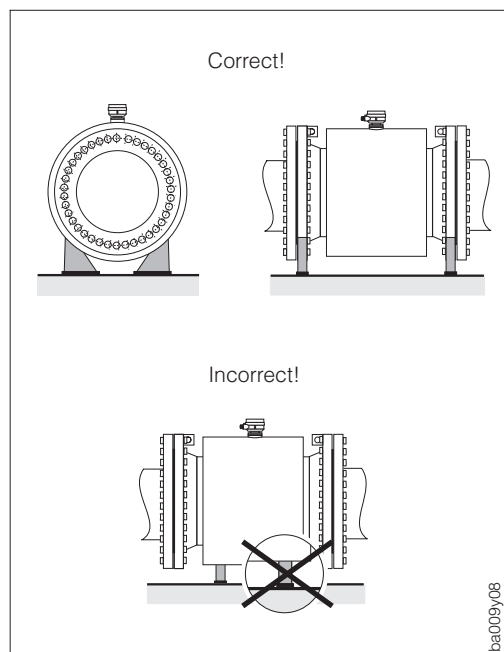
The proper way to support large diameter sensors (DN ≥ 350)
